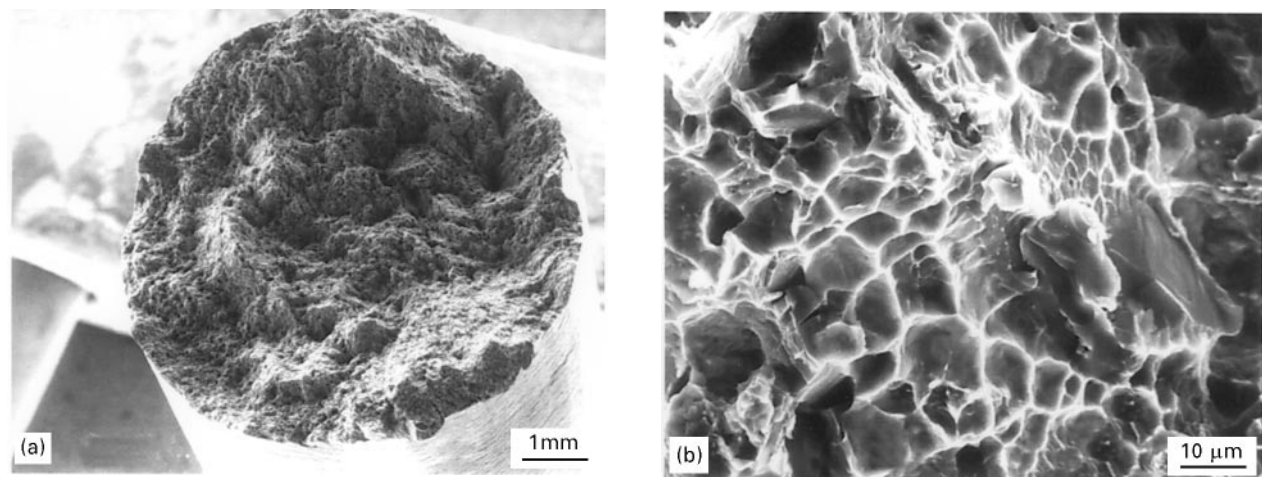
(a, b) SEM images of tensile fracture surface of the extruded material tested at 371 °C (700 °F).
